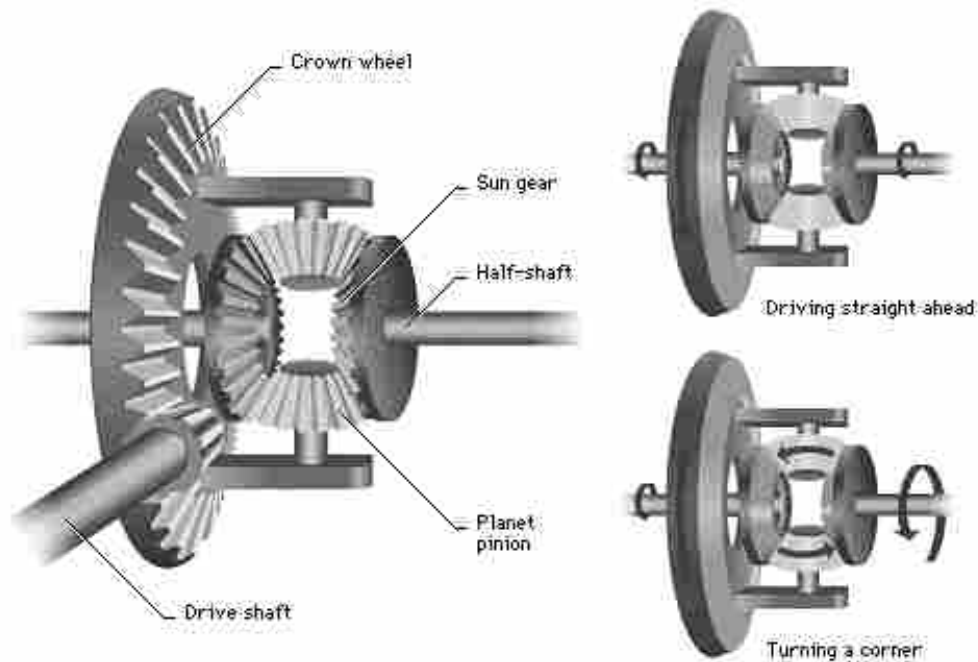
Bevel gear differential on the rear axle of an automobile [10].
